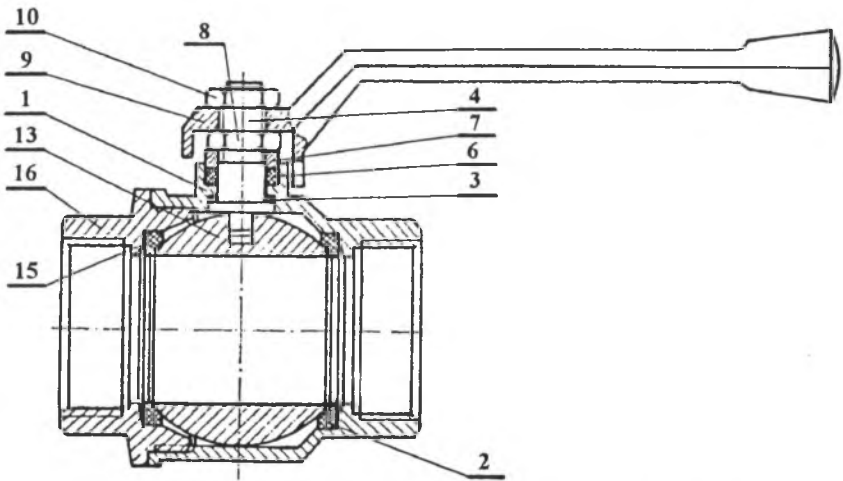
Ball valve assembly (parts numbers refer to their numbers on worksheet - see Fig. 2)
